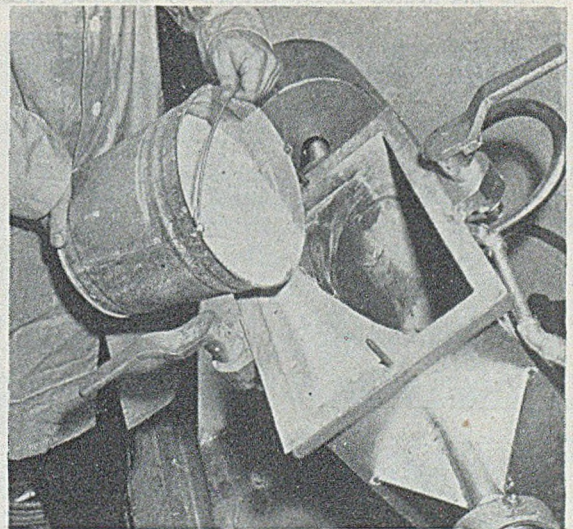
Charging the Mould-making Machine with the Resin/Sand Mixture.
